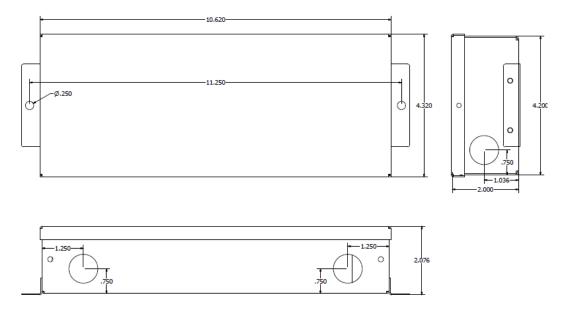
LD100-24DC-D10-UE mounting dimensions.
